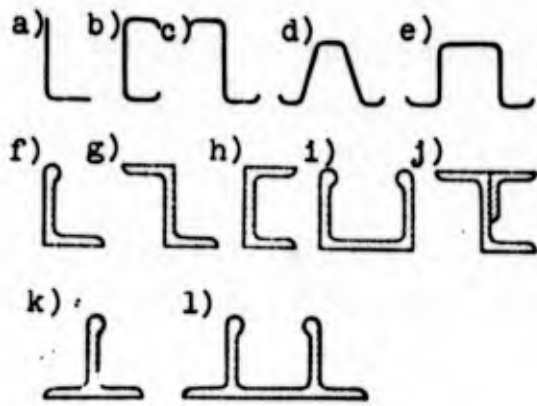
Transverse cross sections of fuselage stringers (examples).
